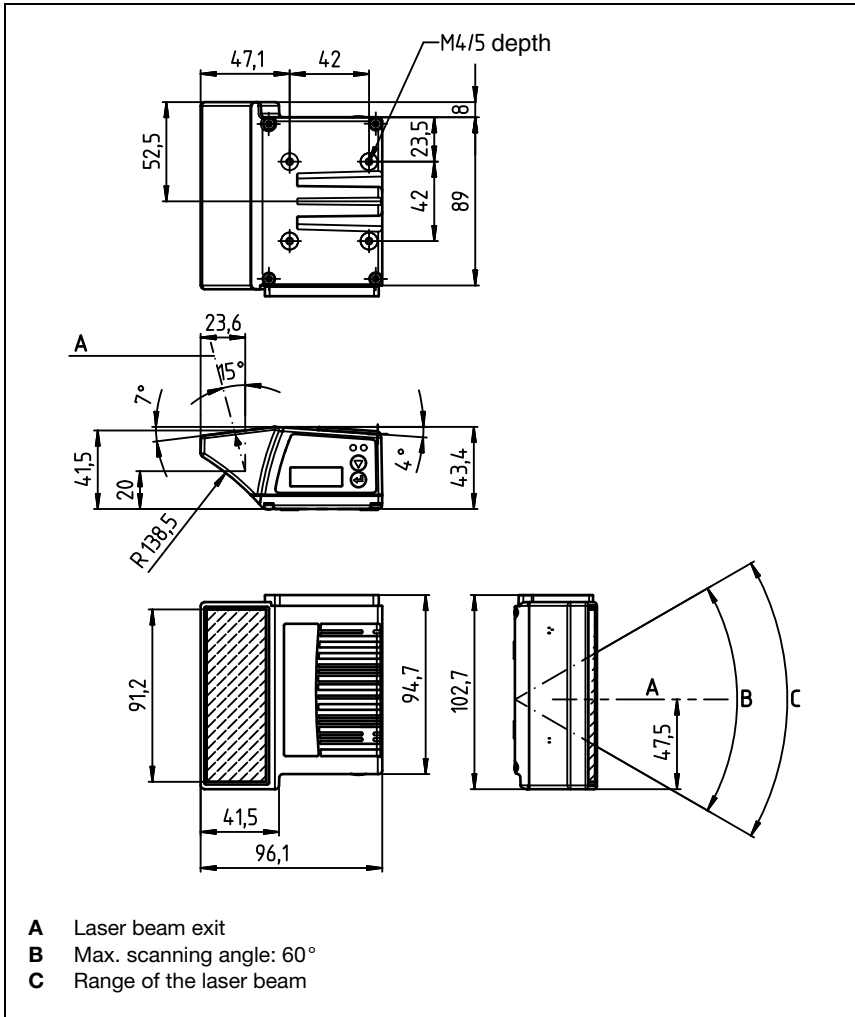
Dimensioned drawing BCL 358*i* deflection mirror scanner S...100
